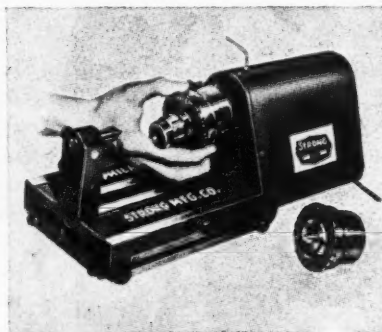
Strong Grinder Attachment with Collet-holding Faceplate that is Interchangeable with Standard Index Faceplate
